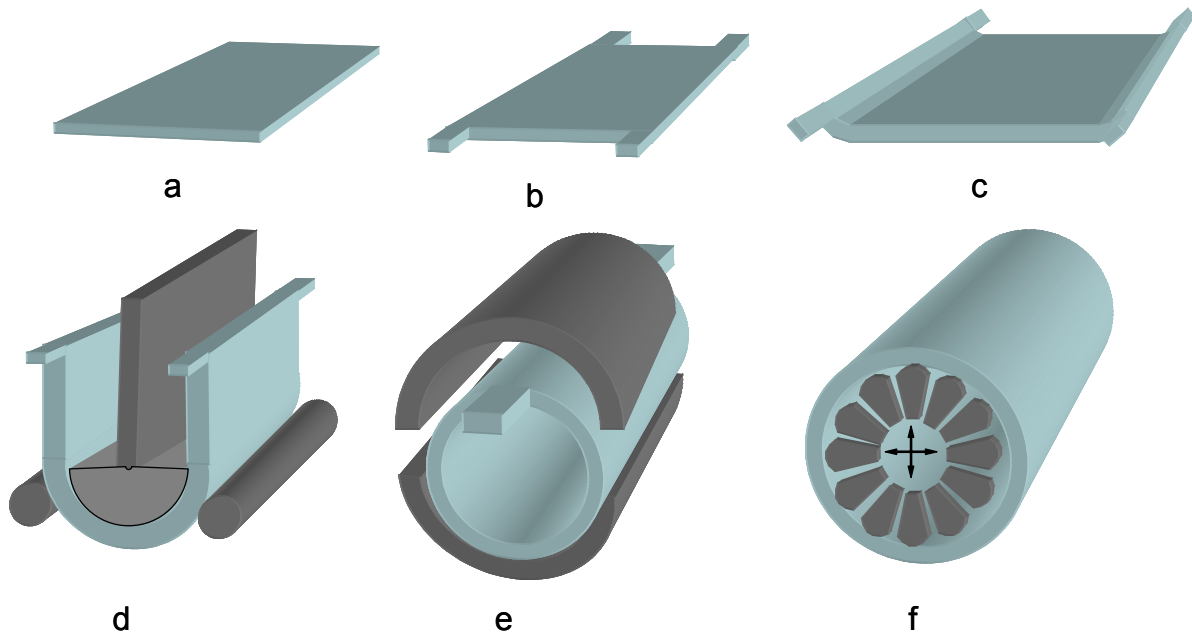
Schematic diagram of the UOE pipe forming process: (a) – initial plate, (b) – welding of the tabs, (c) – pre-forming of the plate edges, (d) – U-ing stage, (e) – O-ing stage, (f) – expansion
